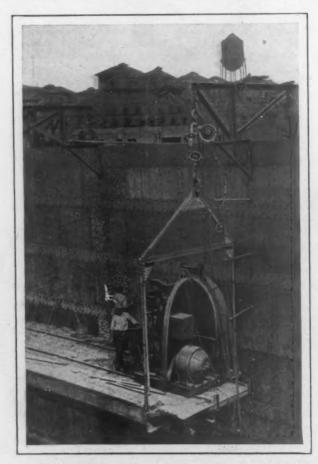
One of the Sixteen Special Foote-Burt Drilling Machines
